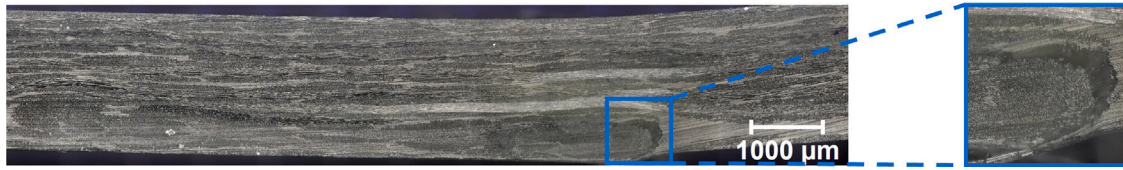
Failure during bending test of a specimen with a fold on the tension side. Fracture through the resin pocket close to the fold; highlighted and zoomed in.
